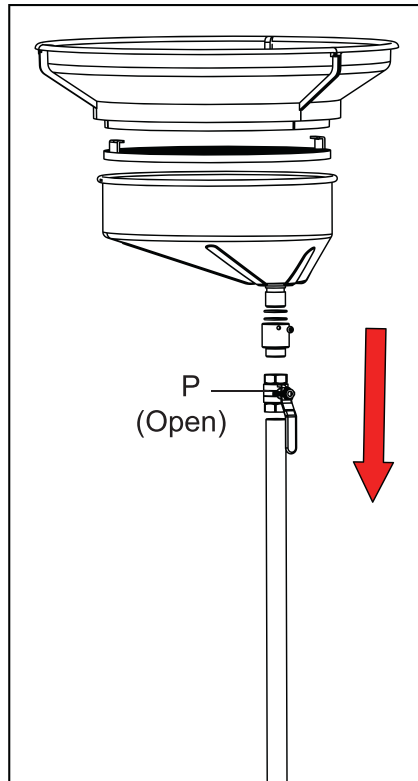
Assemble the supporting tube, ball valve (P), oil collecting bowl, filtrating plank and extension funnel orderly.
